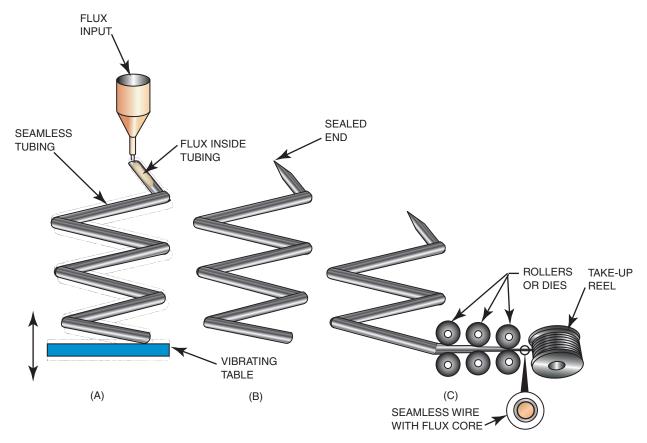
This shows one method of filling seamless FCA welding filler metal with flux. The vibration helps compact the granular flux inside the tube.
